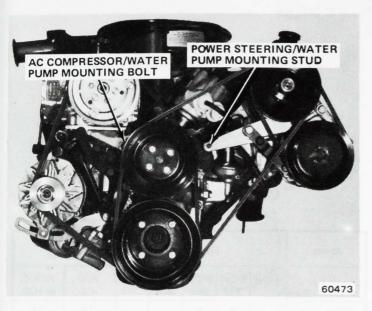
C-24 Water Pump Removal—Eight-Cylinder
